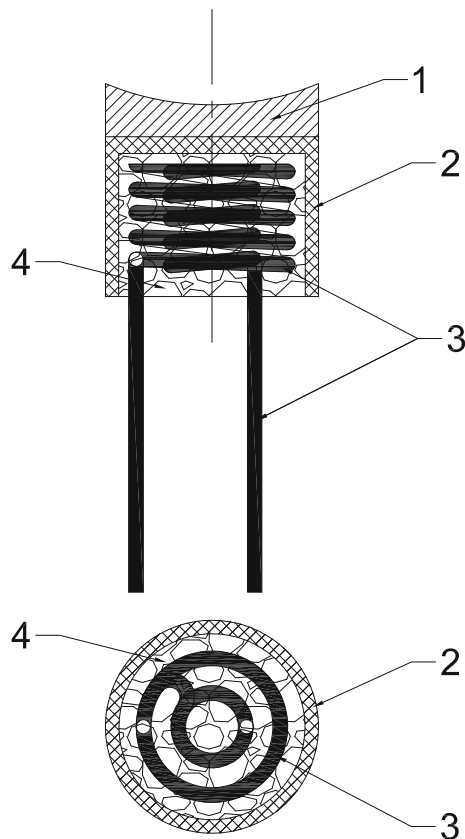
Heater assembly geometry: 1—cathode, 2—support cylinder, 3—coiled filament wire, 4—alumina potting
